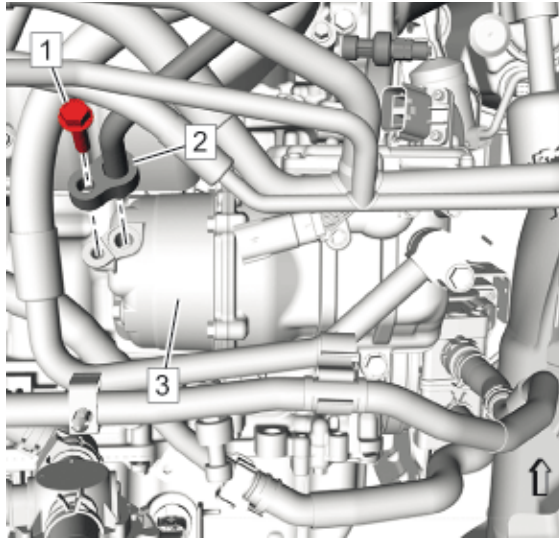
Air Conditioning Compressor, Condenser Hose And Bolt
